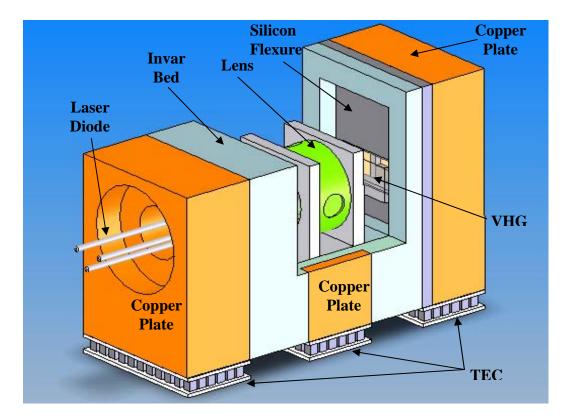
Schematic drawing of the generation 1 VHG laser system design.
